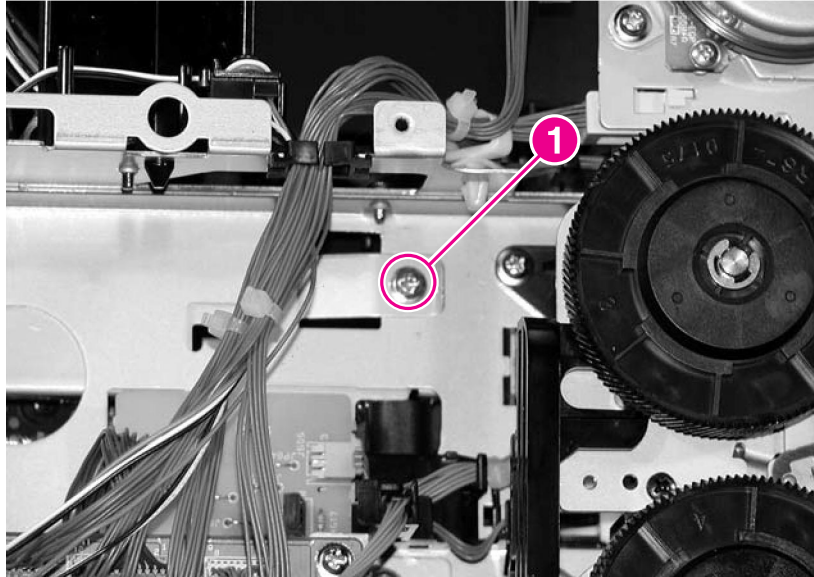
Remove the left side laser/scanner retaining bar (1 of 2, left side of printer)
